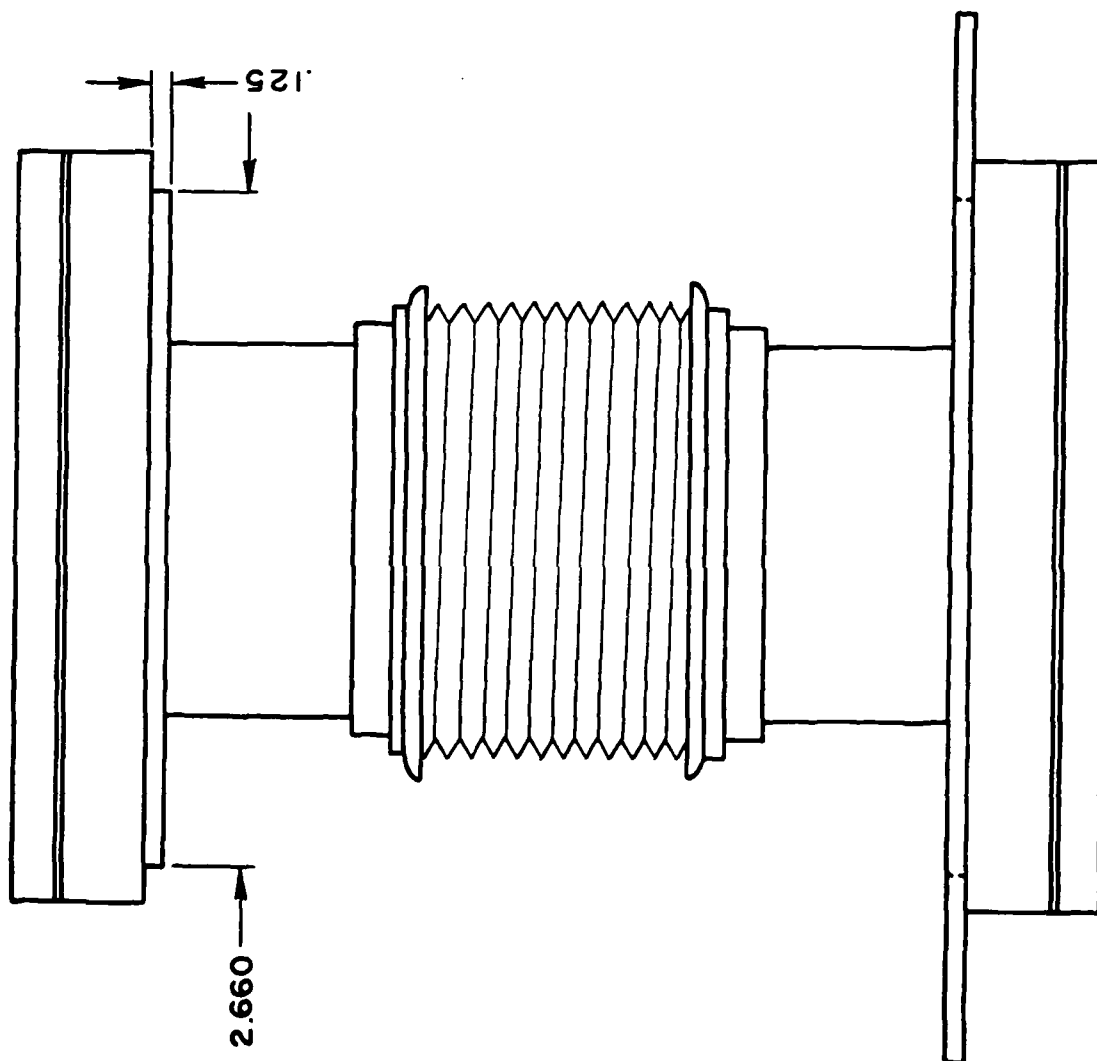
MODIFIED WELDED BELLOWS
